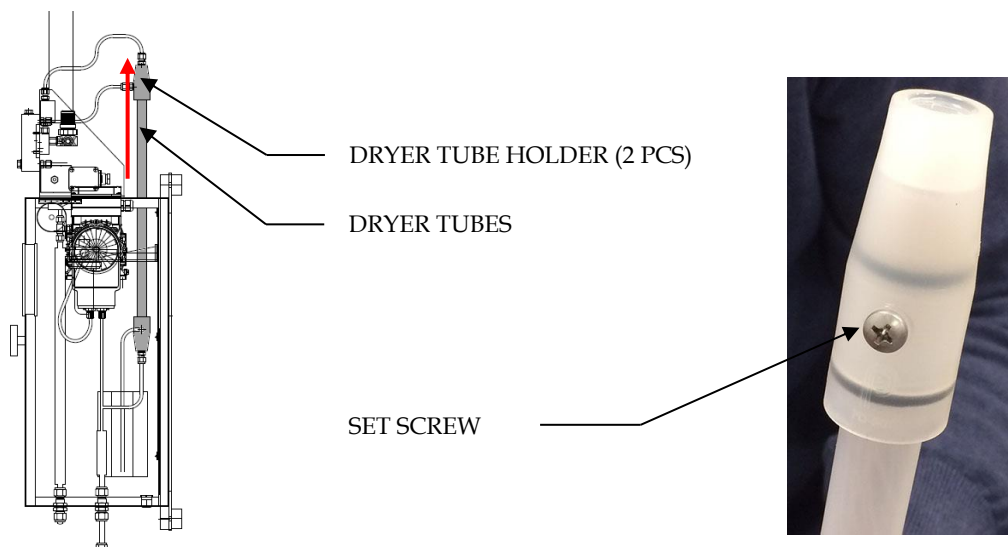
ShipCEMS sample gas dryer (dryer tubes)
